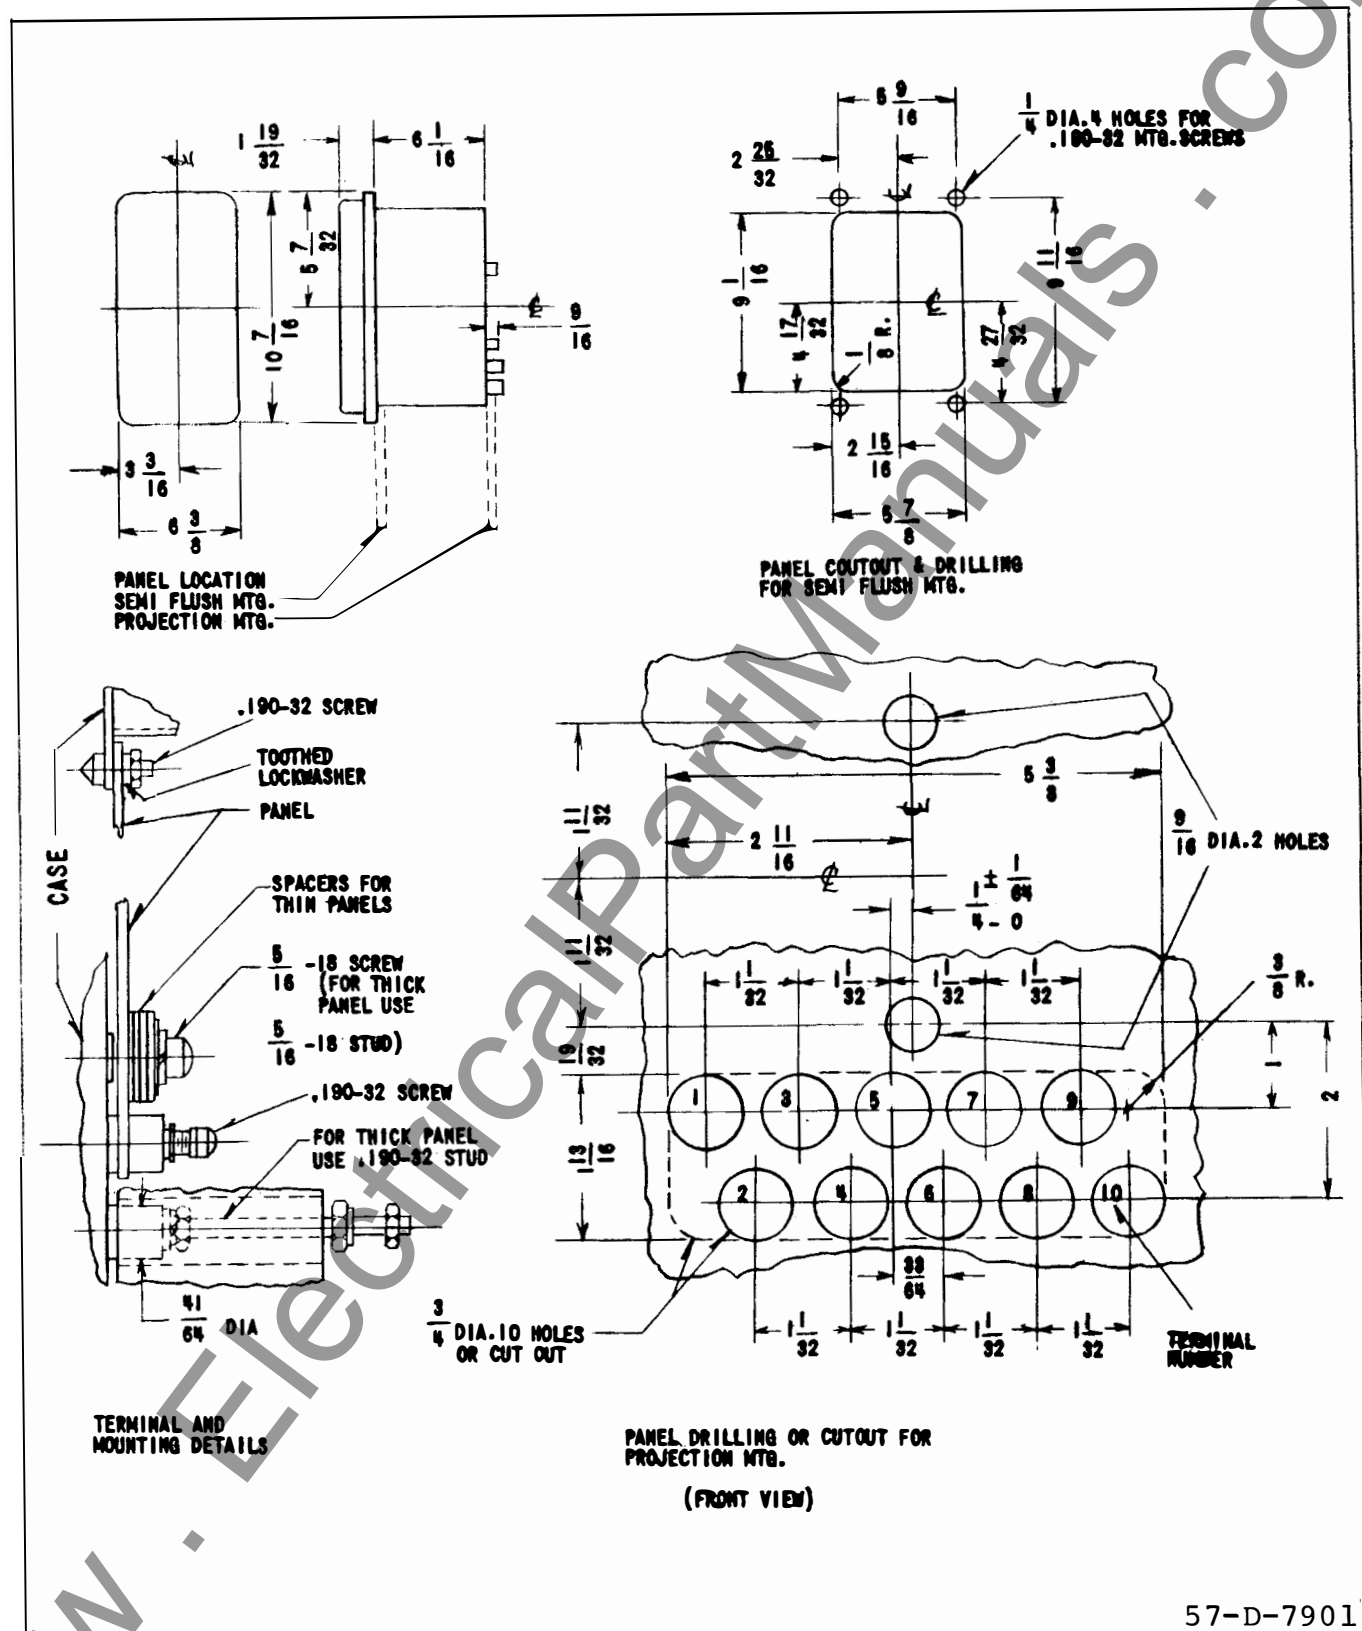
Outline and Drilling Plan (FT-21 Case)
